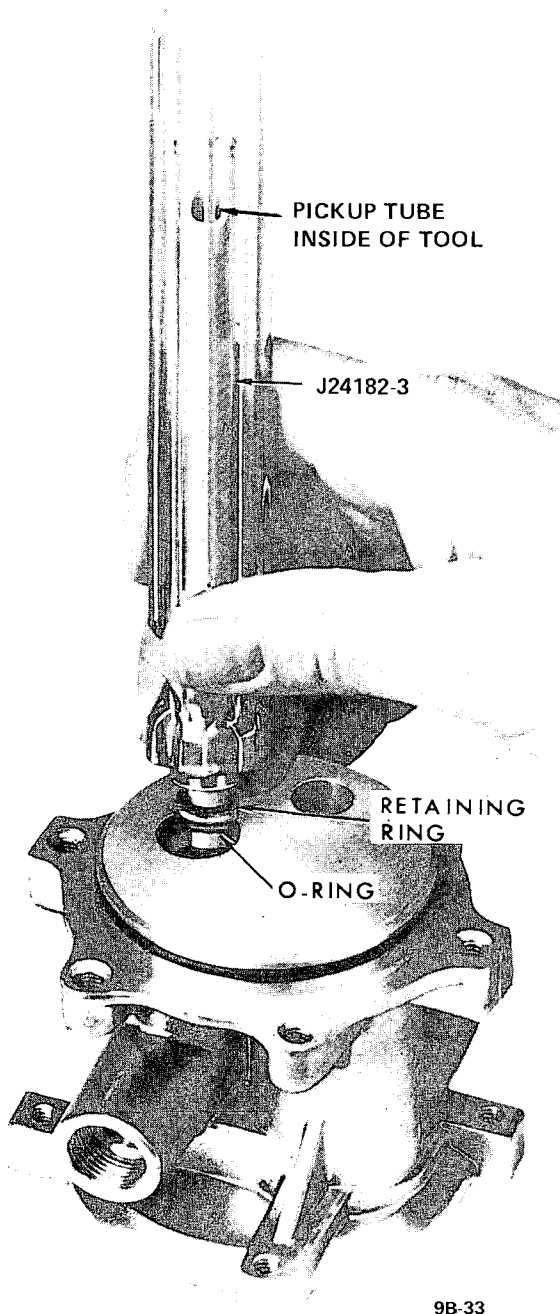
B-22 Pick-Up Tube Assembly to Valve Housing
